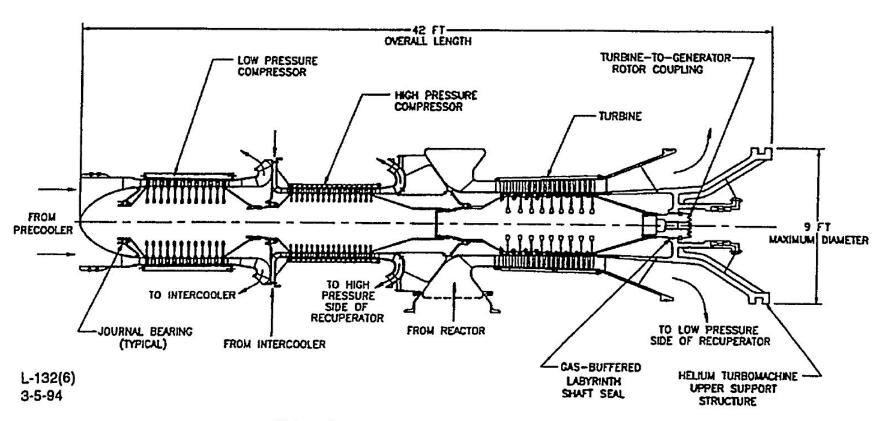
HELIUM TURBOCOMPRESSOR LAYOUT
